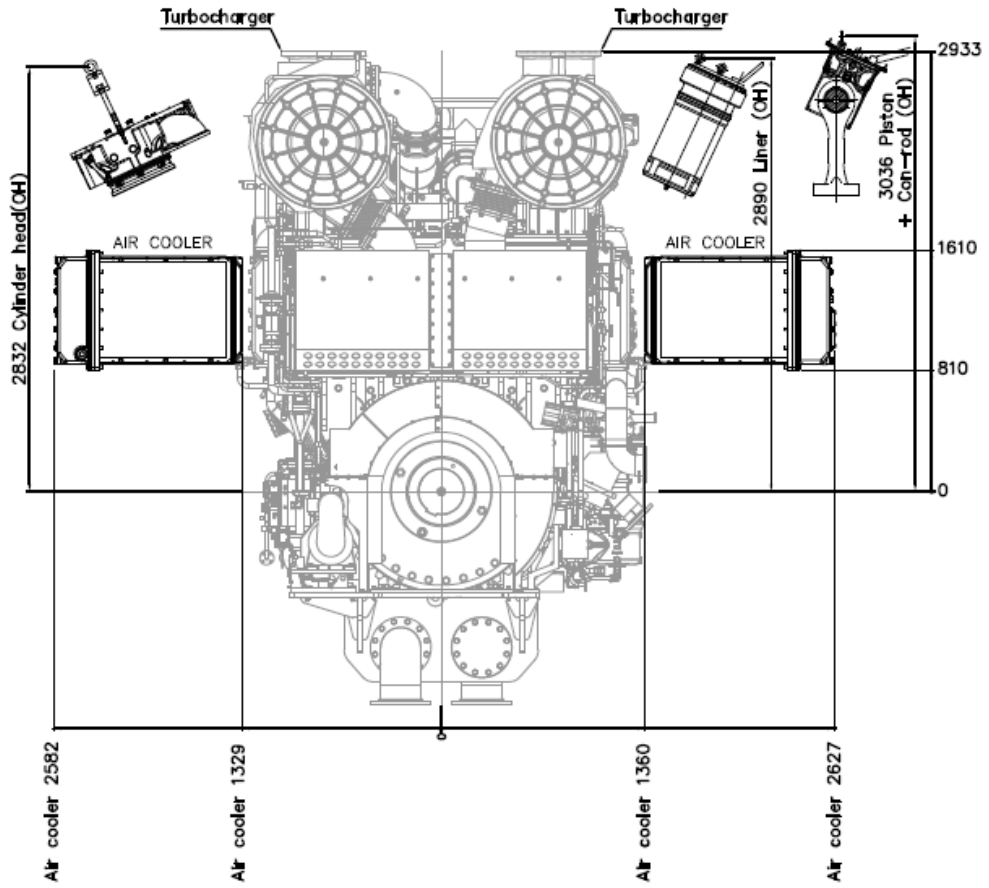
V-type engine overhaul dimensions for major components
